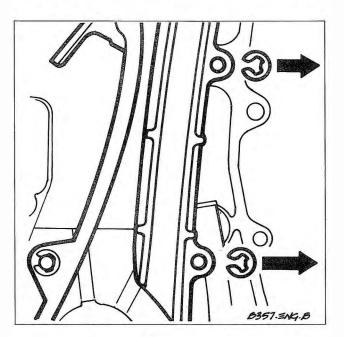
Camshaft timing chain guide rail mounting circlips. Remove circlips in direction of arrows.
